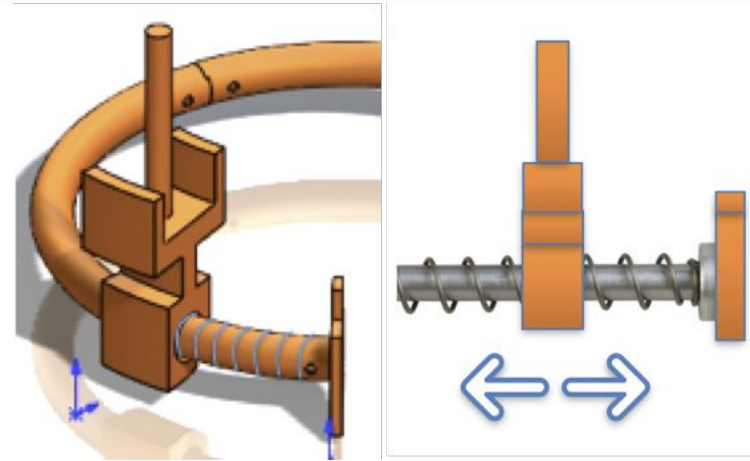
Inside the device, springs surround a cylindrical track. The springs are positioned so that they are stretched and compressed by the plungers as the user's jaw rotates.
